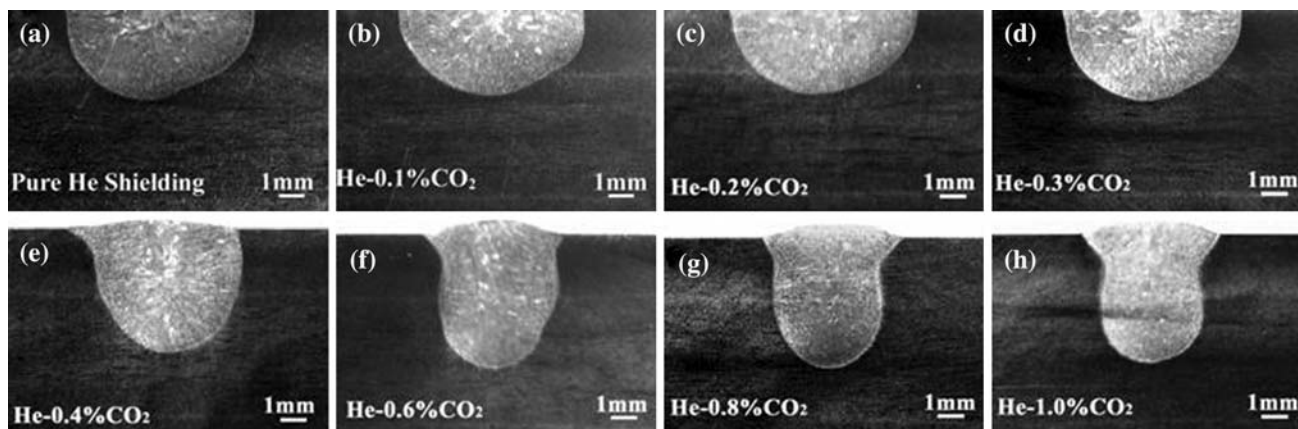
Weld shapes under different He–CO₂ shielding with 1 mm arc length
